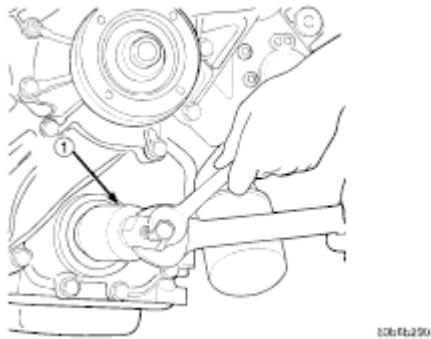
Removing Crankshaft Front Seal Using Special Tool 8511
